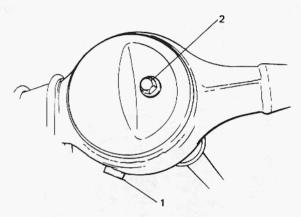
① Drain plug ② Oil level & filler plug
